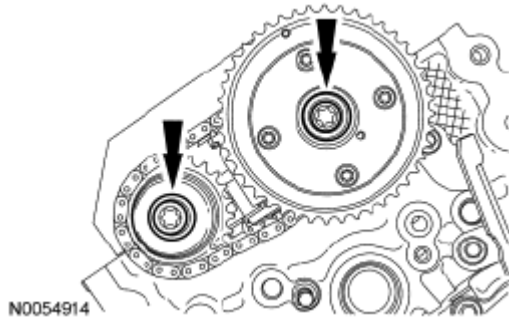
Locating VCT Assembly Bolt & RH Exhaust Camshaft Sprocket Bolt
